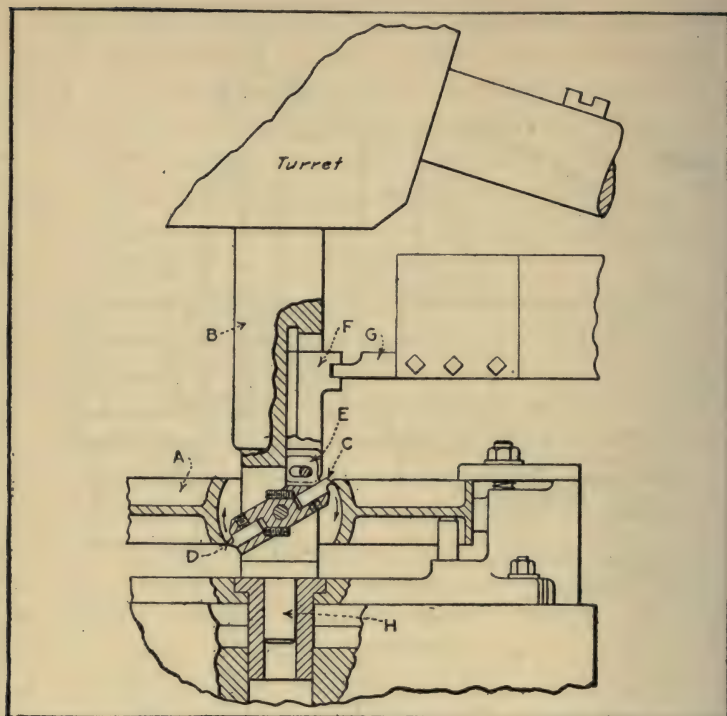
INTERNAL-RADIUS BORING ATTACHMENT
